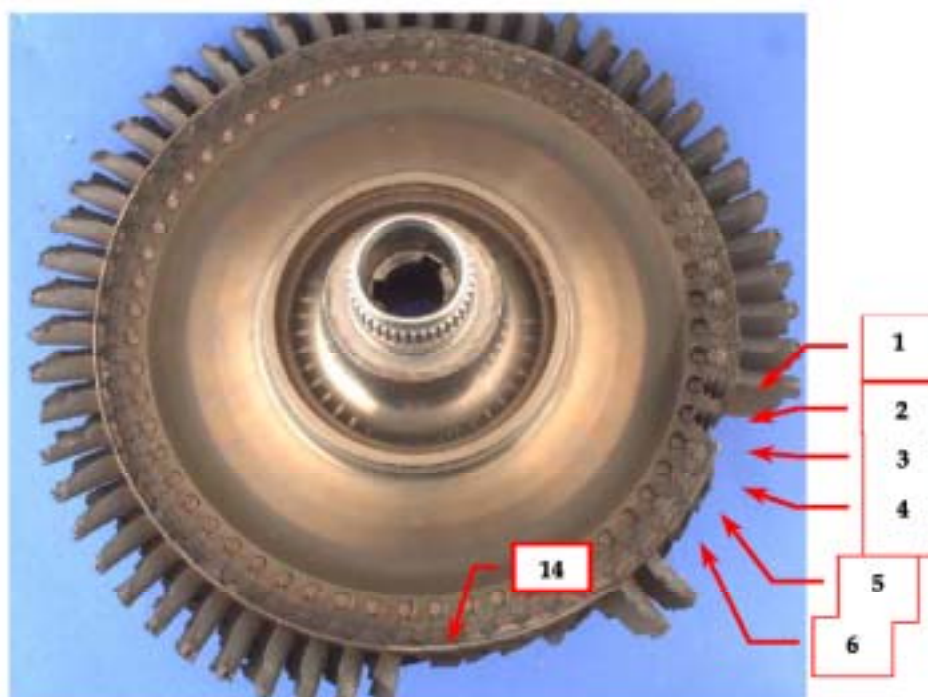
Photograph of the CT turbine disk assembly as received. Blade 1 (containing the primary fracture surface) and Blade 2 were removed by P&WC. DSTO labelled the blades from 1 to 59 in the clockwise direction
